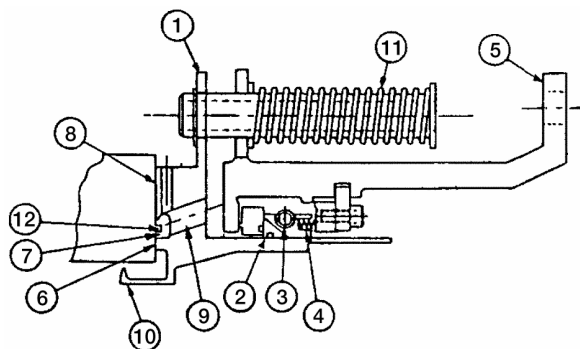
Cross-section of the enhanced 36 in. diameter face seal.
